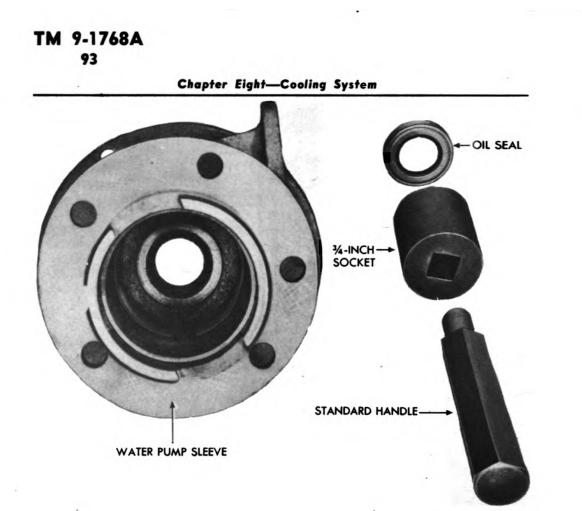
Tools Used To Install New Oil Seal in Water Pump Sleeve
